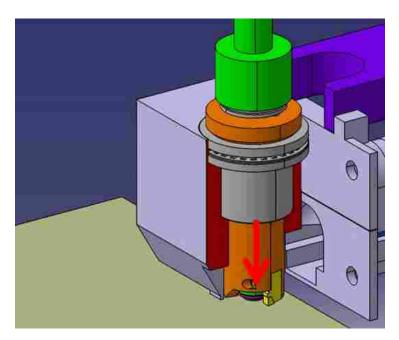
The Driver and Flash Cutter Assembly Move Down and Start the Weld
